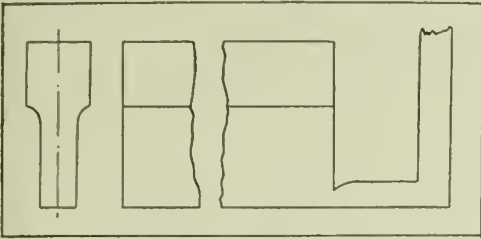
STANDARD CASTING FOR THE PREPARATION OF TEST PIECES.
